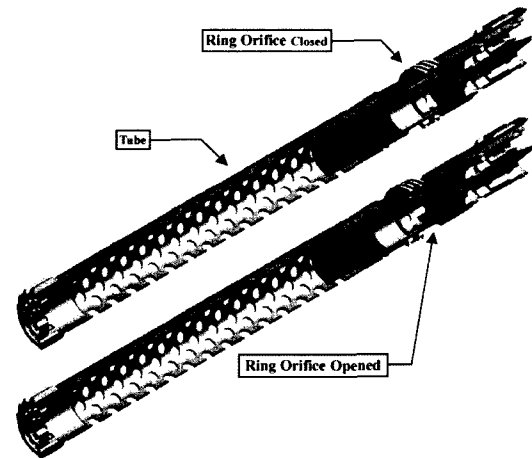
3D Sectional View of FARE Device Provisional Design Change
